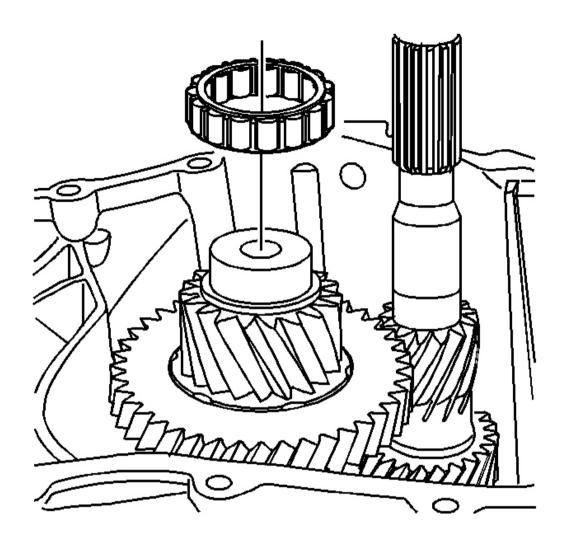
View Of Roller Bearing Courtesy of GENERAL MOTORS CORP.
